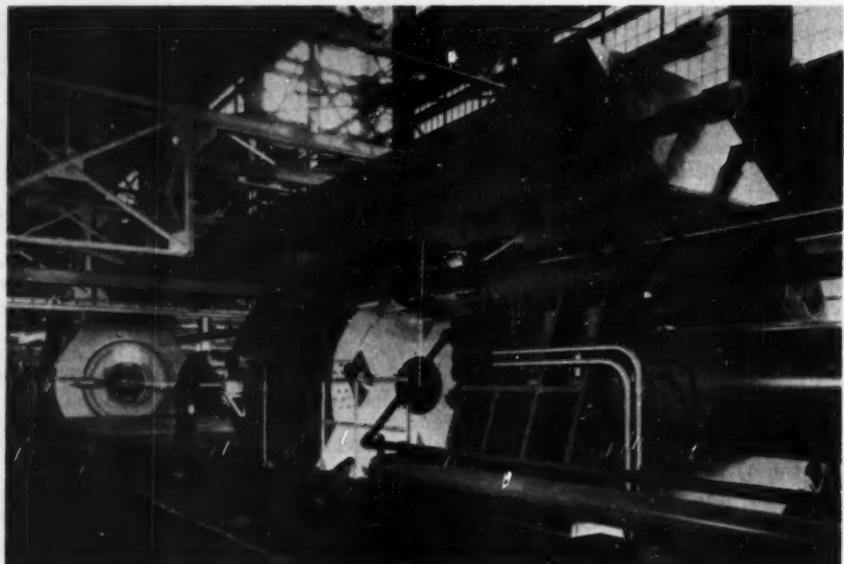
The 3,000,000-lb stretcher shown is used to pull extrusions produced on the world's largest extrusion press at Alcoa's Lafayette (Ind.) Works. The 180-ft-long giant stretcher has a pull of 38 diesel locomotives and will straighten 110-ft-long extrusions.
